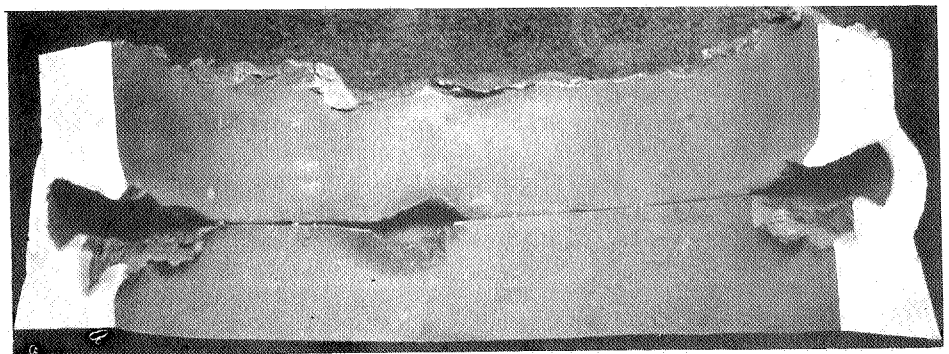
Effects of coke buildup on the inside surfaces of pipe welds.
